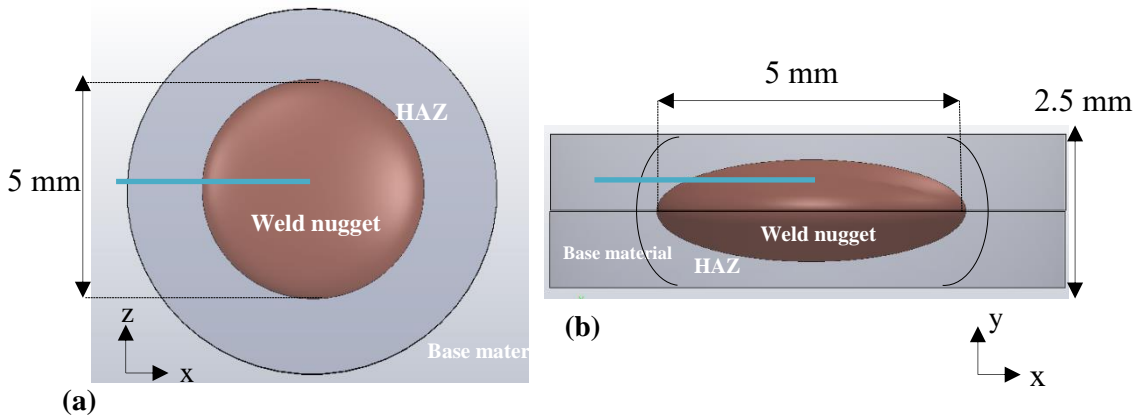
Schematic representation of a welded sample (a) top view and (b) side view, the dark shape represents the weld nugget. The straight lines indicate the positions at which residual stresses were measured.
